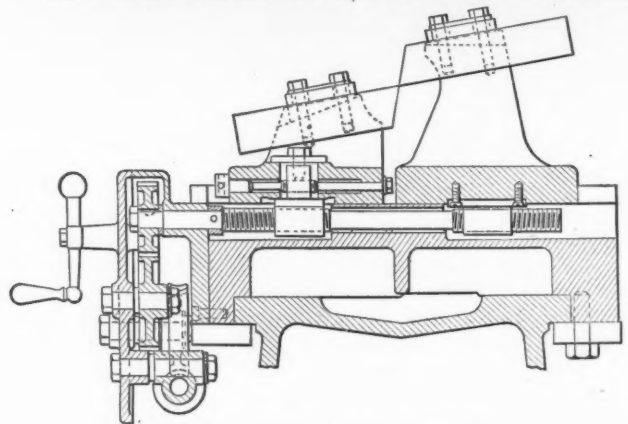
CUTTING-OFF TOOL SLIDES.
